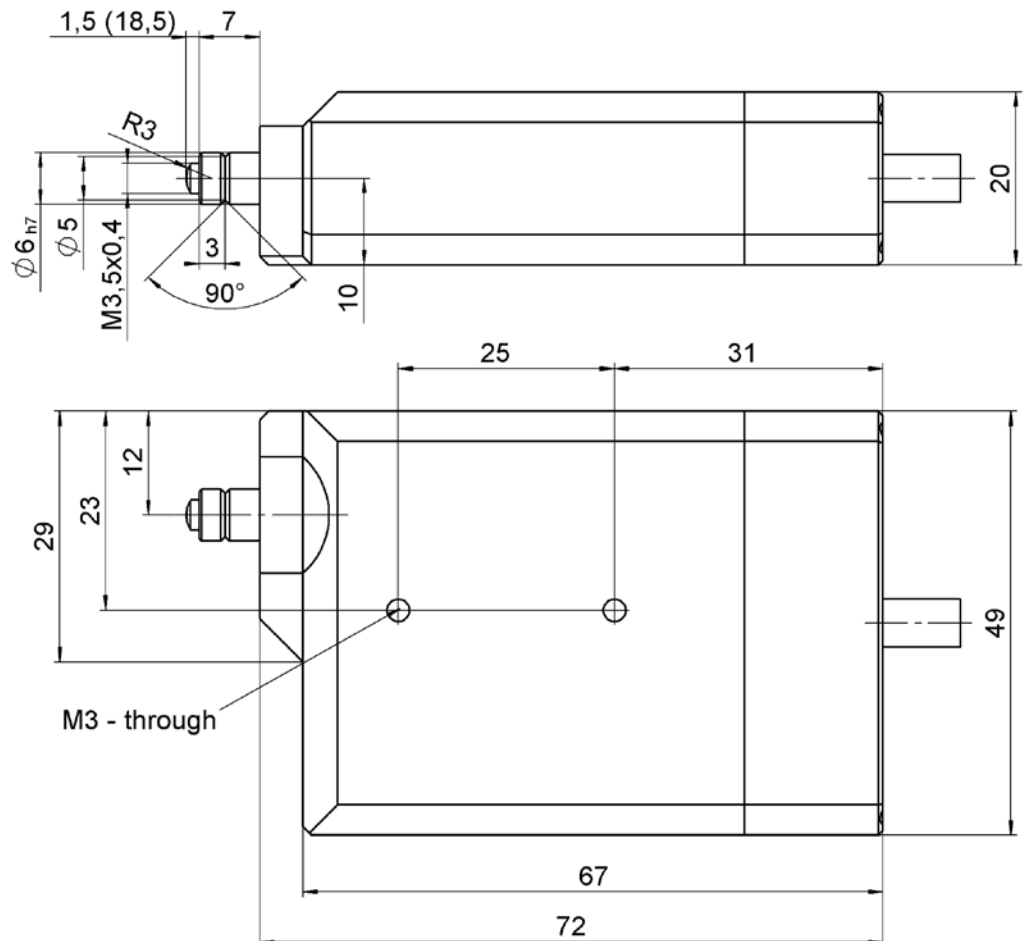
M-232.17 and M-232.17S linear actuator, dimensions in mm
